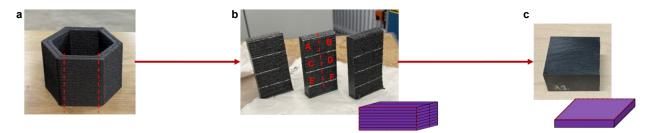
Manufacturing steps for tools produced through the hybrid manufacturing process. (a) A 2-bead thick hexagon is first printed in which the six sides are then cut to form (b) plates and subsequently (c) the 25.4 mm x 25.4 mm tools.
